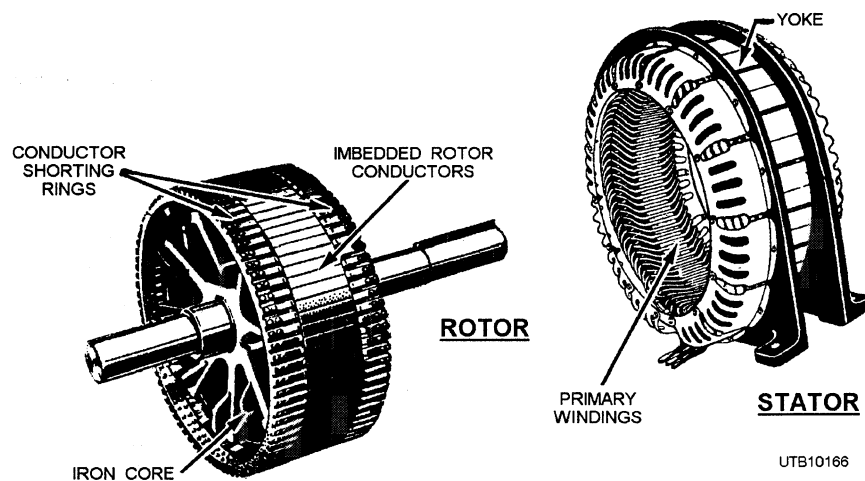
Rotor and stator assemblies of an induction motor.
